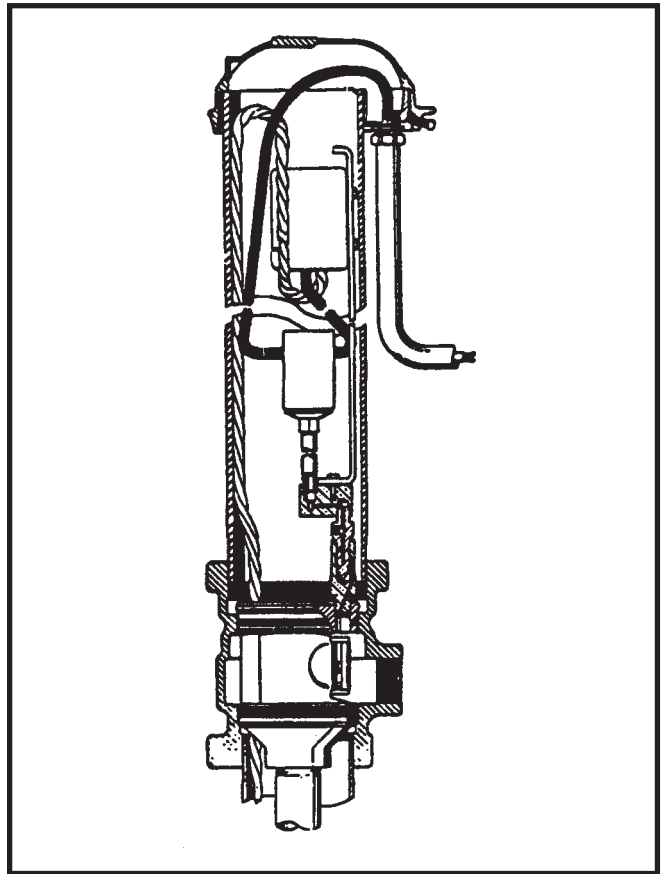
MONITOR PS UNIT CUTAWAY TO SHOW OAWSP CONTROL KIT INSTALLED IN OPERATING POSITION.
